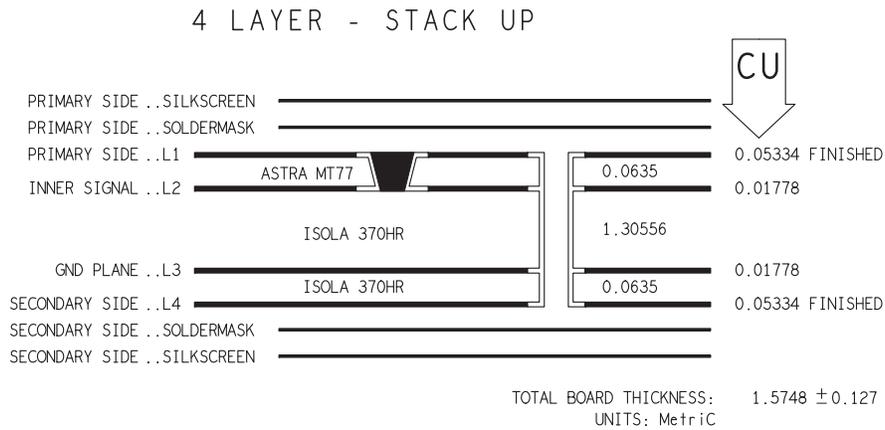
■ PRT-80002 Printed Circuit Board Composition
